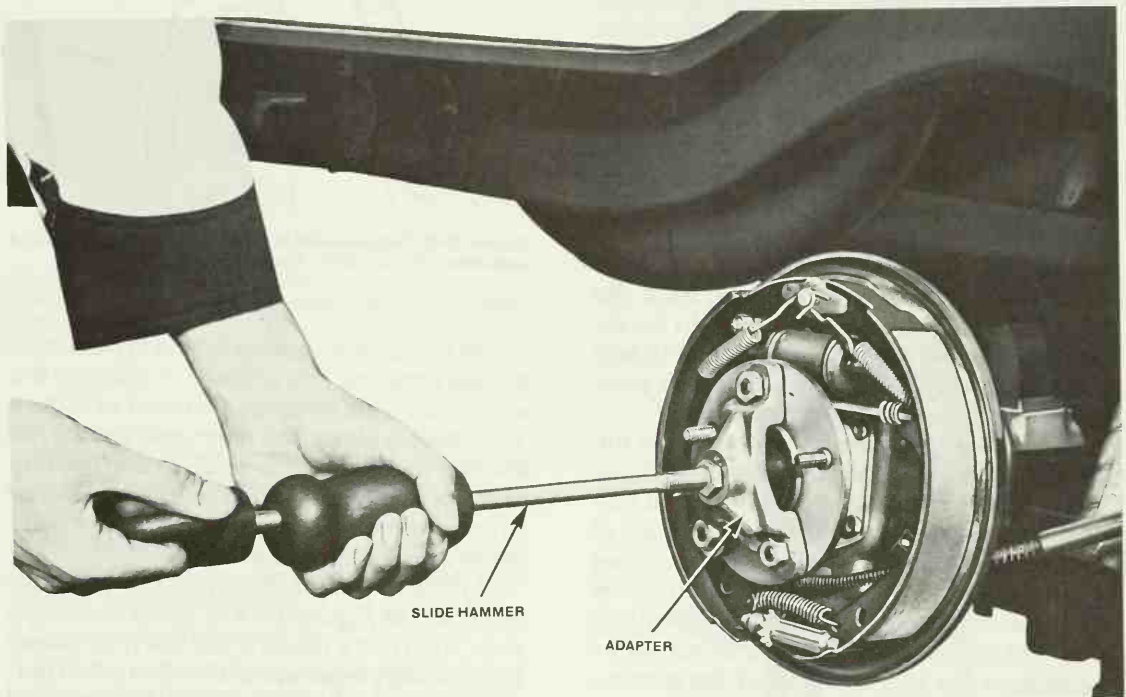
An axle puller uses a slide hammer attached to the axle flange. (Chevrolet Motor Division of General Motors Corporation)
